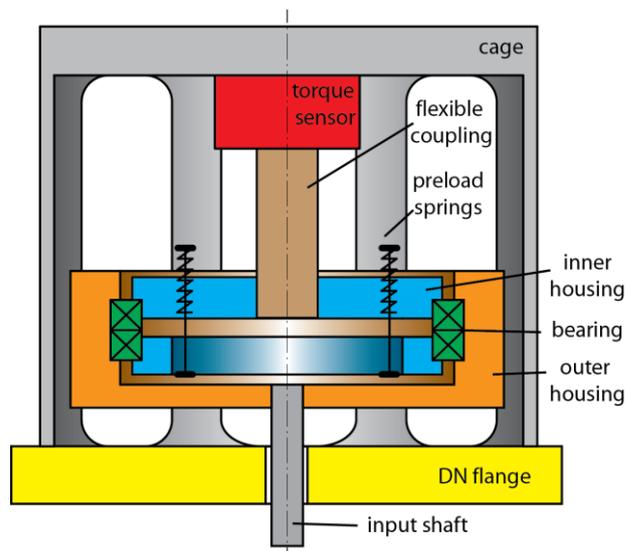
Detailed illustration of the green part from Fig. 32 - bearing housing.
